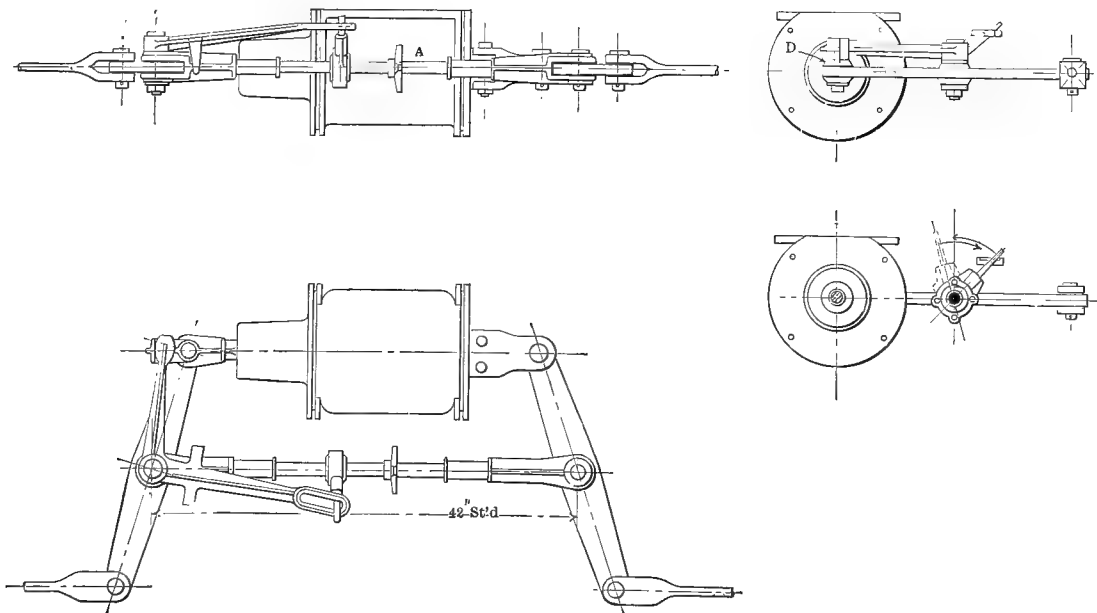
Creco Slack Adjuster for Passenger Train Cars. Chicago Railway Equipment Company.
